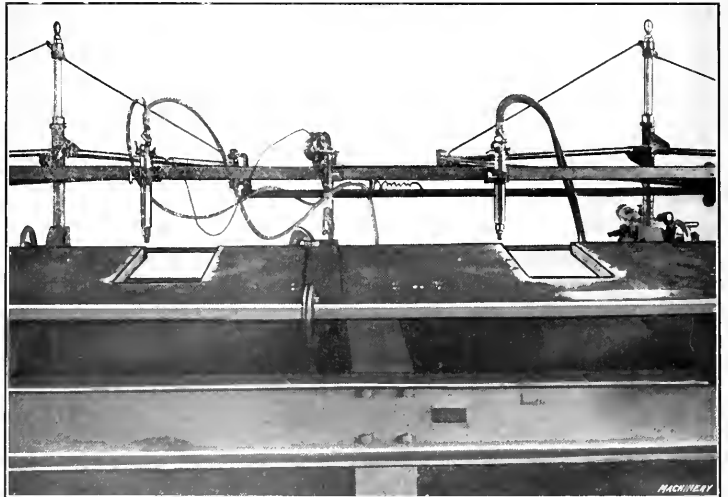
Front View of No. 2 Oxygraph making a Duplicate Cut
